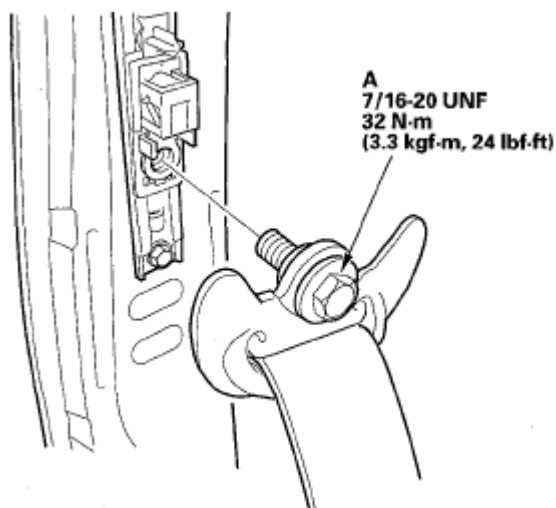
Identifying Upper Anchor Bolt Tightening Torque
